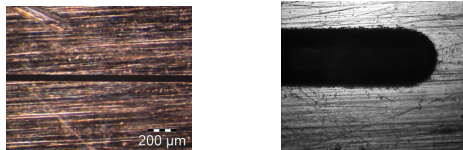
Al mask machined by μ -EDM (line end shown in the right picture).
